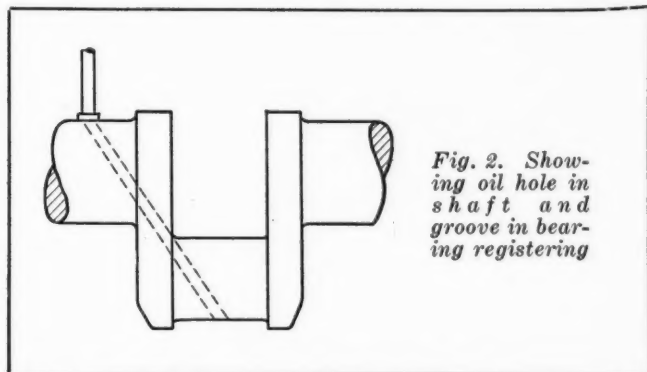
Showing oil hole in shaft and groove in bearing registering
